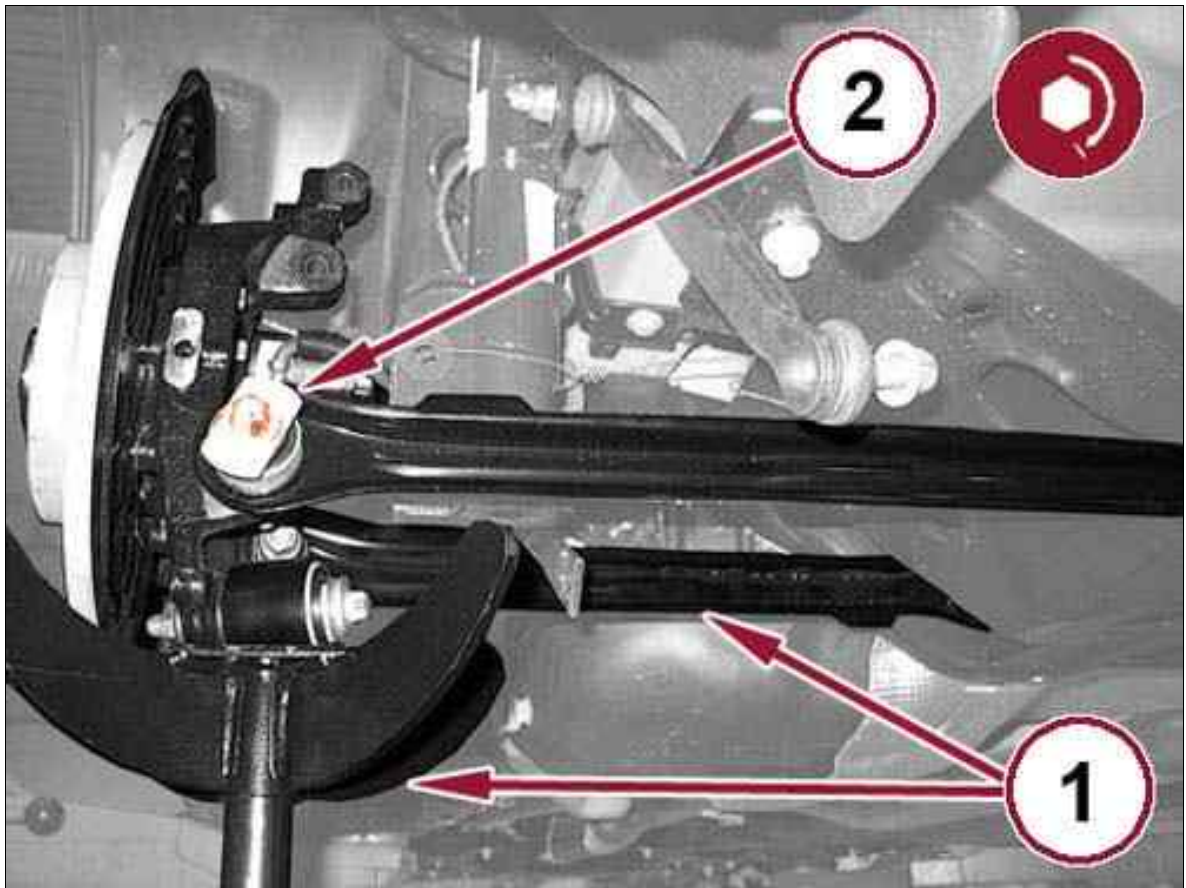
Rear Lower Control Arm To Crossmember Bolt
